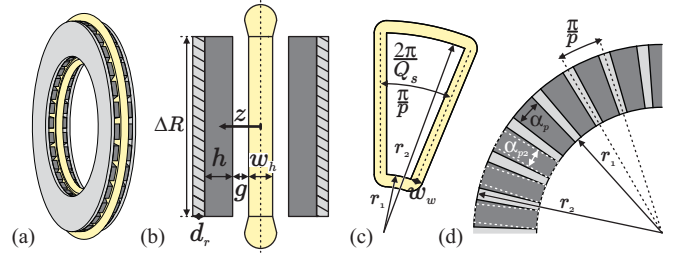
Geometrical models of the considered axial flux machines (AFM). (a) 3D view of the AFM. The AFM consist of an air cored stator winding and two axially magnetized rotor discs with surface mounted permanent magnets. (b) AFM side cut view. (c) Top view of one coil. (d) Top view of rotor disc.
